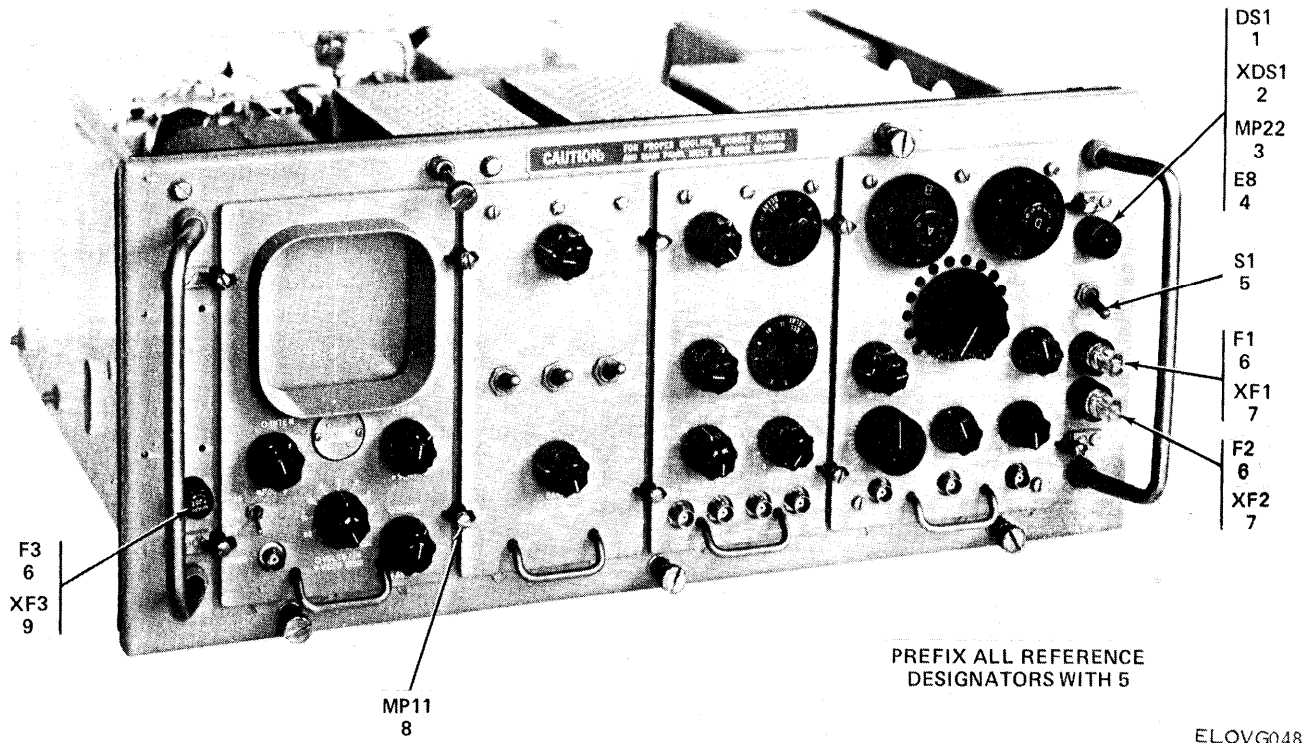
① Chassis assembly, unit 5 (sheet 1 of 2).
